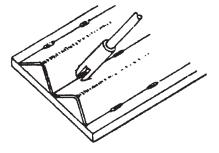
TIP SELECTION, TACK WELD GROOVE
